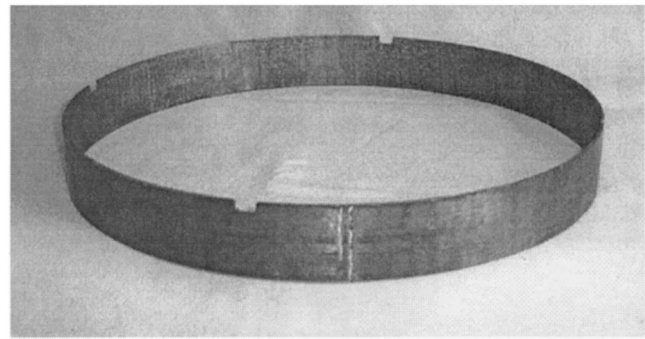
Photograph of a finished prepreg MI-CMC GE-2 shroud ring. The dimensions of the ring were 466 mm ID×57.5 mm wide.
